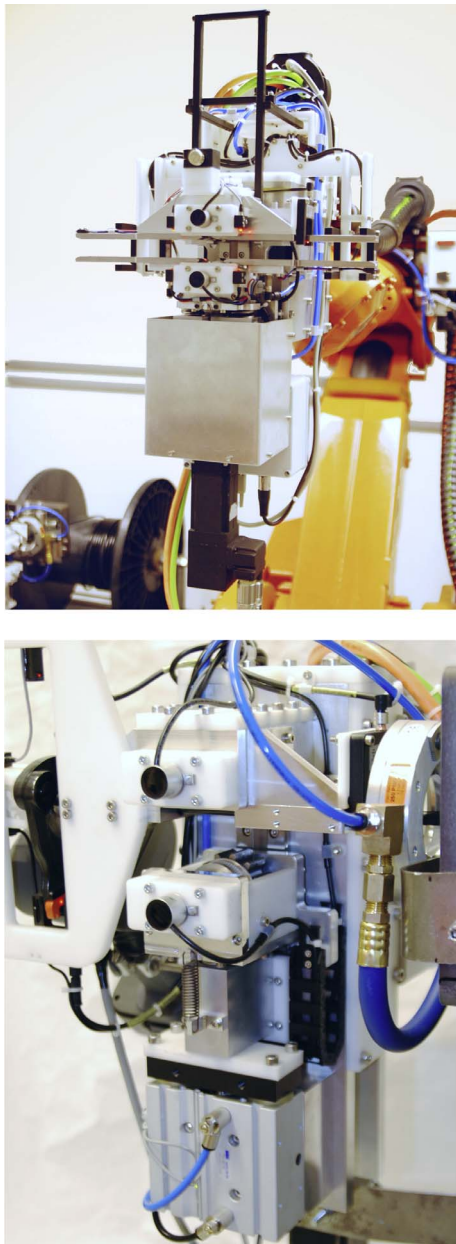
(a) One of the two constructed robot cable feeder tool prototypes. (b) The constructed drum cable feeder tool prototype.
